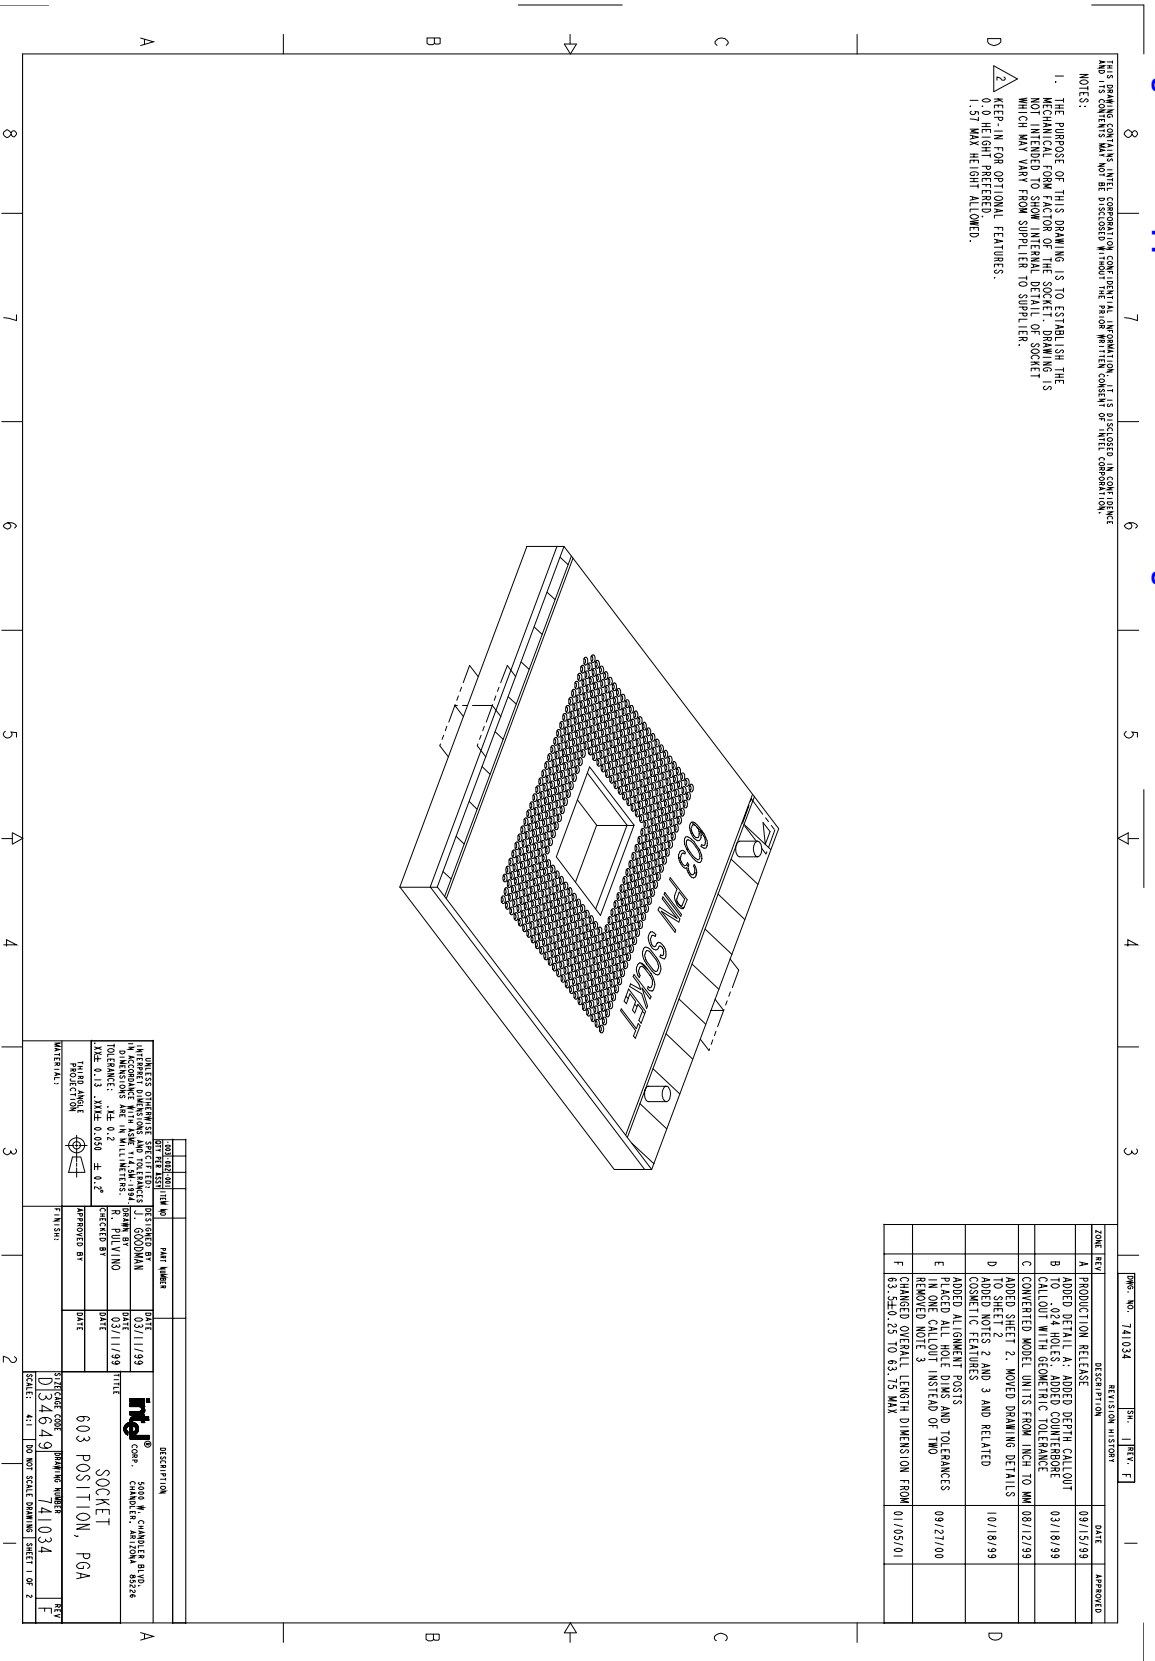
Appendix A.6 603 Pin Socket Keep-In Zone
